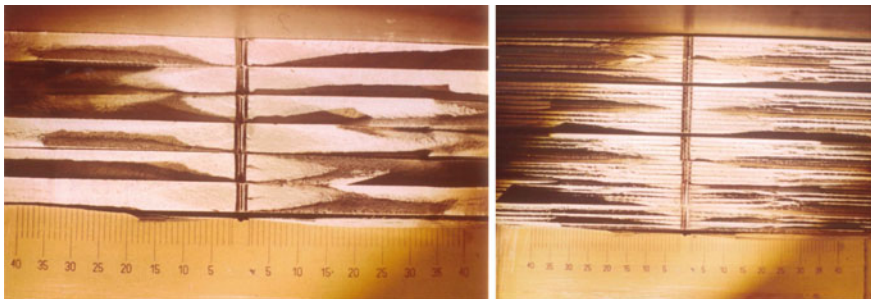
Difference in macroscopic appearance of fatigue fracture surfaces in 5-mm 2024-T3 alclad specimens (*left*) and 5 × 1 mm 2024-T3 alclad laminates (*right*) [20]
